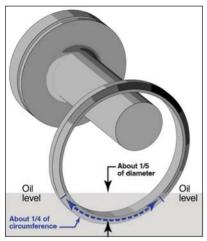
This drawing shows the proper oil level in a horizontal motor.
